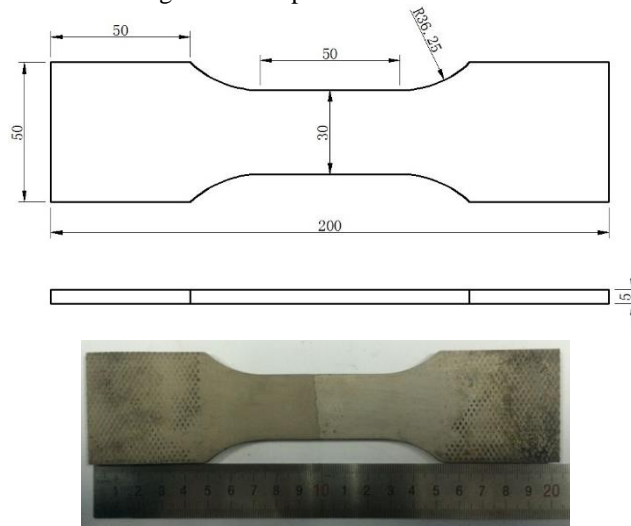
Shape and size of fatigue samples of MB8 base metal
